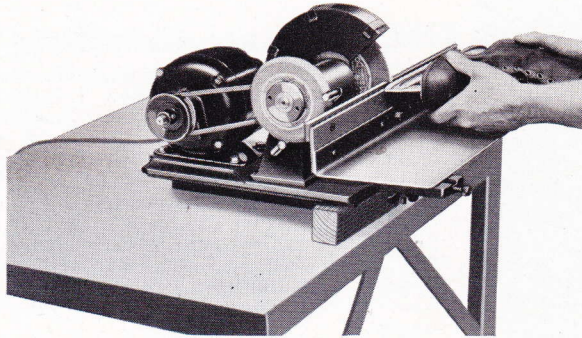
Showing Ideal Bench Grinder Grinding a Skate
